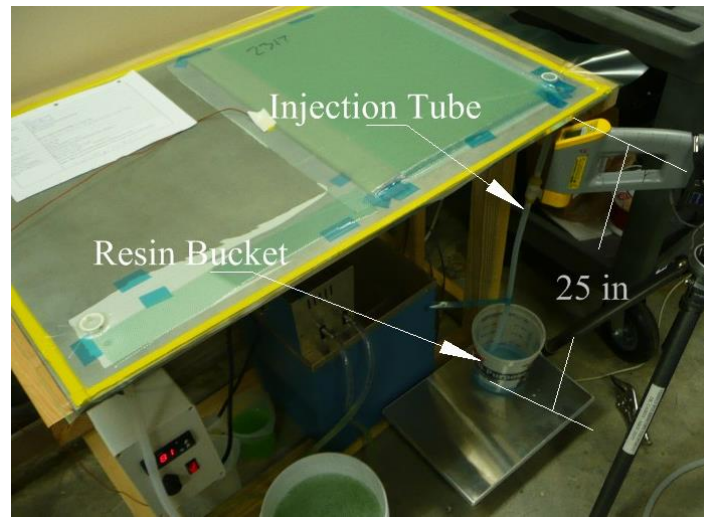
Laminate manufacturing setup with mold surface about 25 inches above resin bucket.
